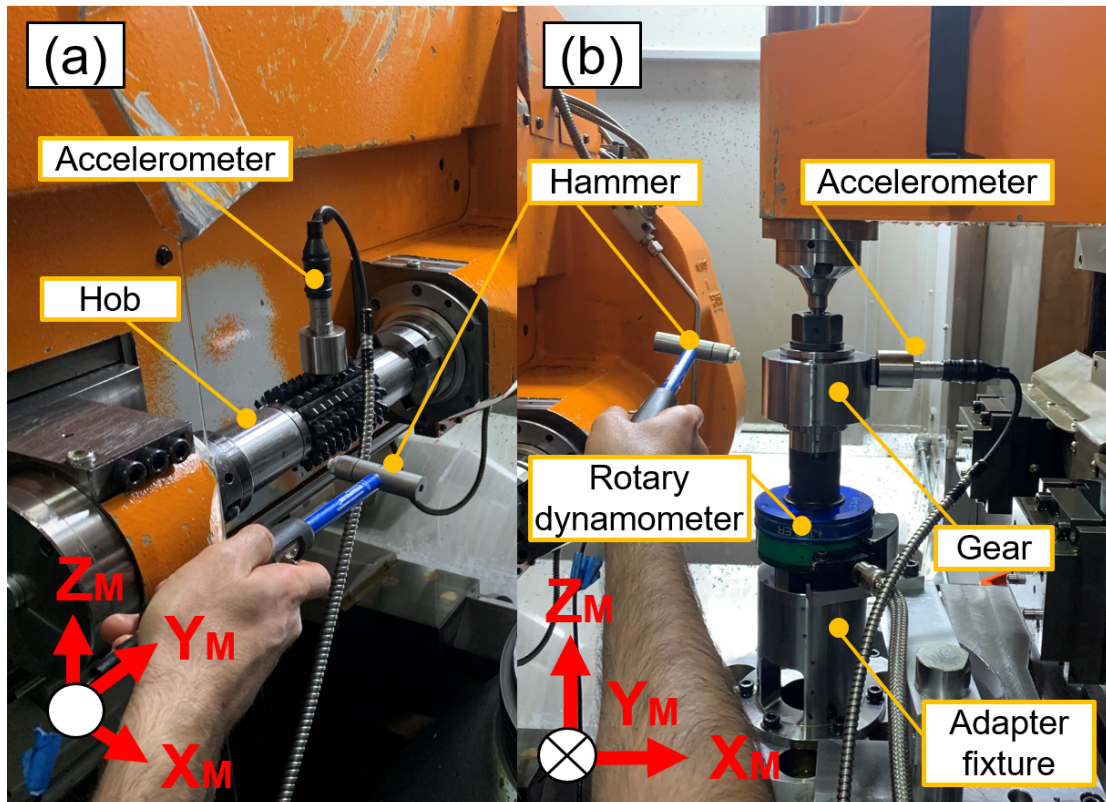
Impact hammer testing on a) hob and b) gear structure (Setup I)
